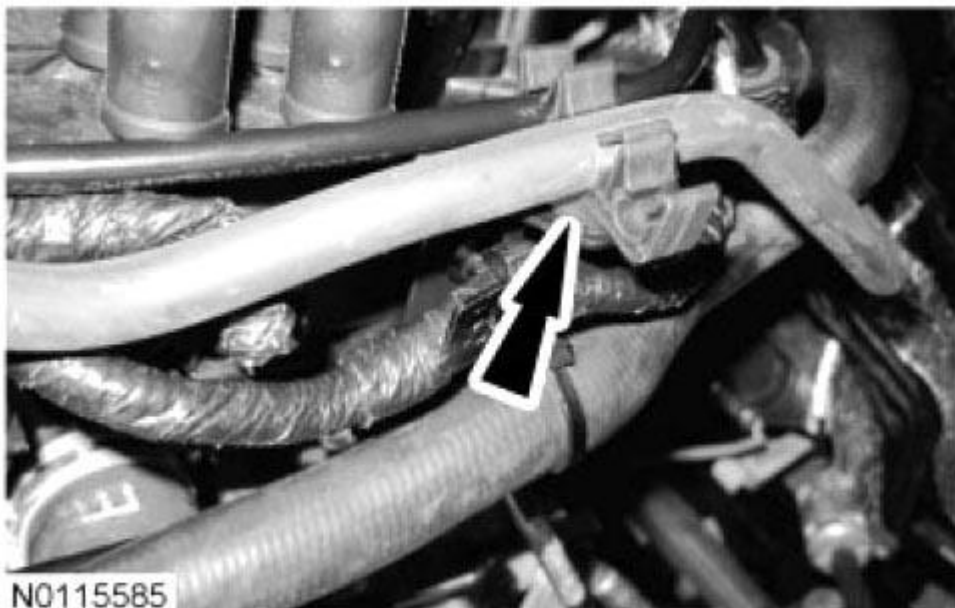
Locating Fuel Tube To Coolant Outlet Bracket Retainer
